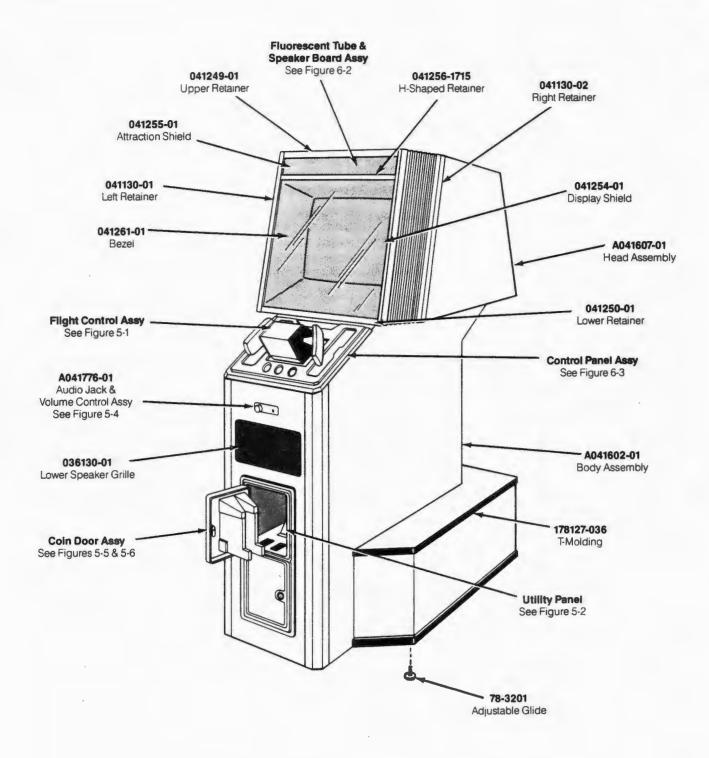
Cabinet-Mounted Assemblies A041600-xx B
